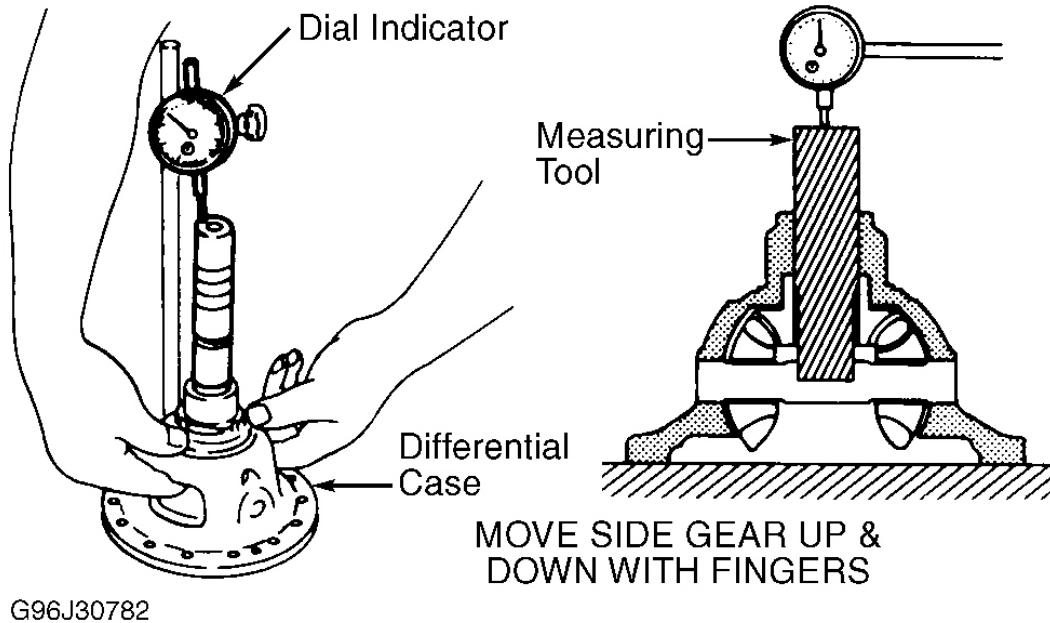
Measuring Side Gear-To-Differential Case Clearance
